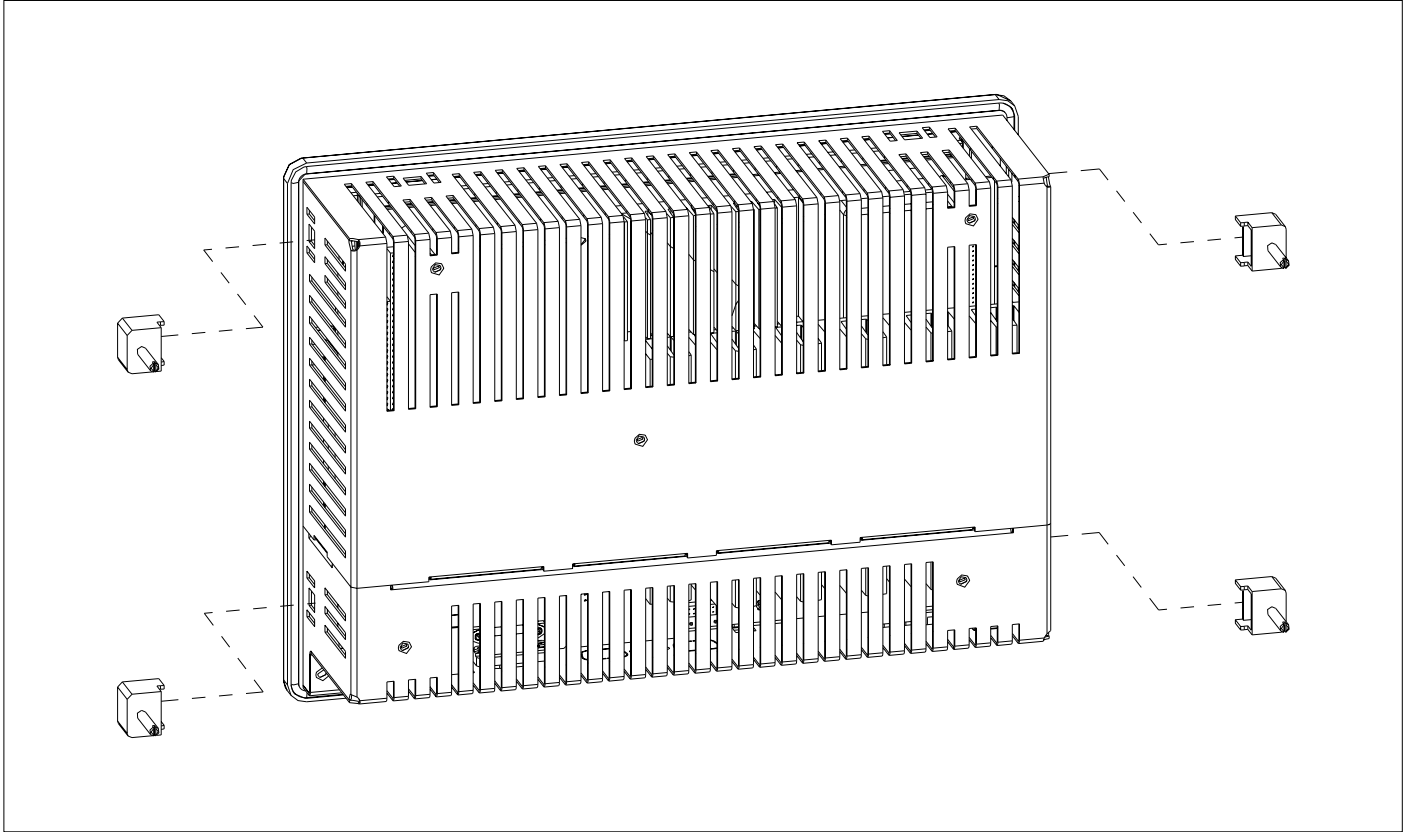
Panel mounting GF\_VEDO HL 121CT
